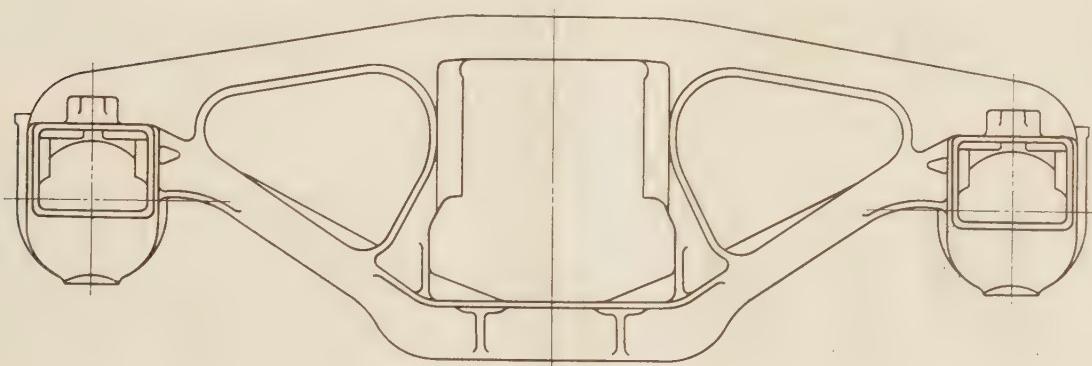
THE INTEGRAL-BOX CAST-STEEL SIDE FRAME
